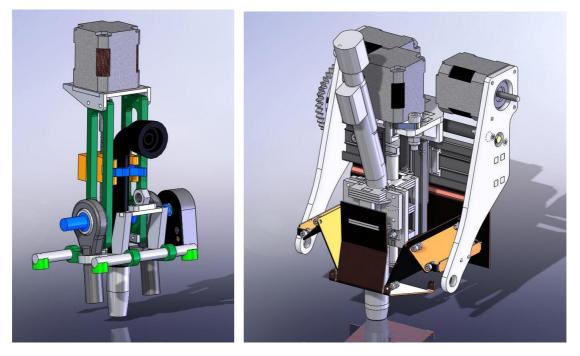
Two kinematics versions of the weld torch manipulator.
